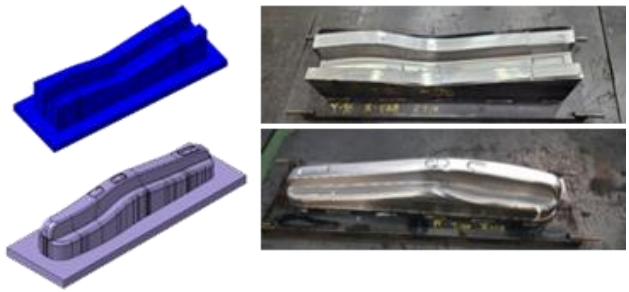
Shape modification of the tool surface shape for the spring-back improvement
